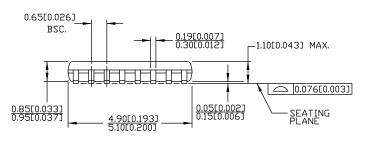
16-pin TSSOP (4.40 mm Body) Z16.173/ZZ16.173 Package Outline, 51-85091
